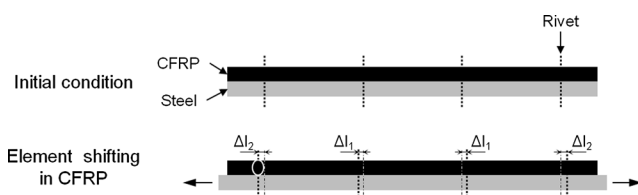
Element shifting in mixed material constructions under thermal expansion
